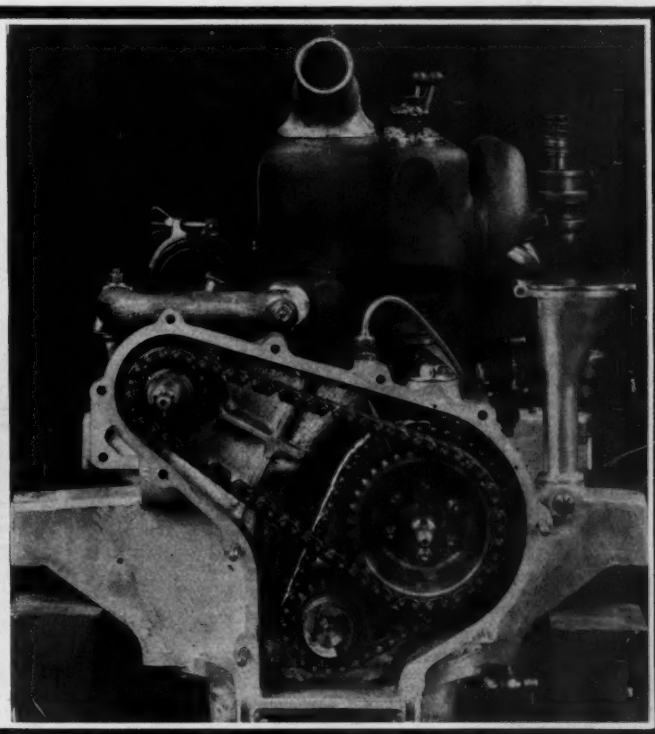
CHAIN DRIVE FOR CAMSHAFTS ON WOLSELEY 1912 MOTOR
